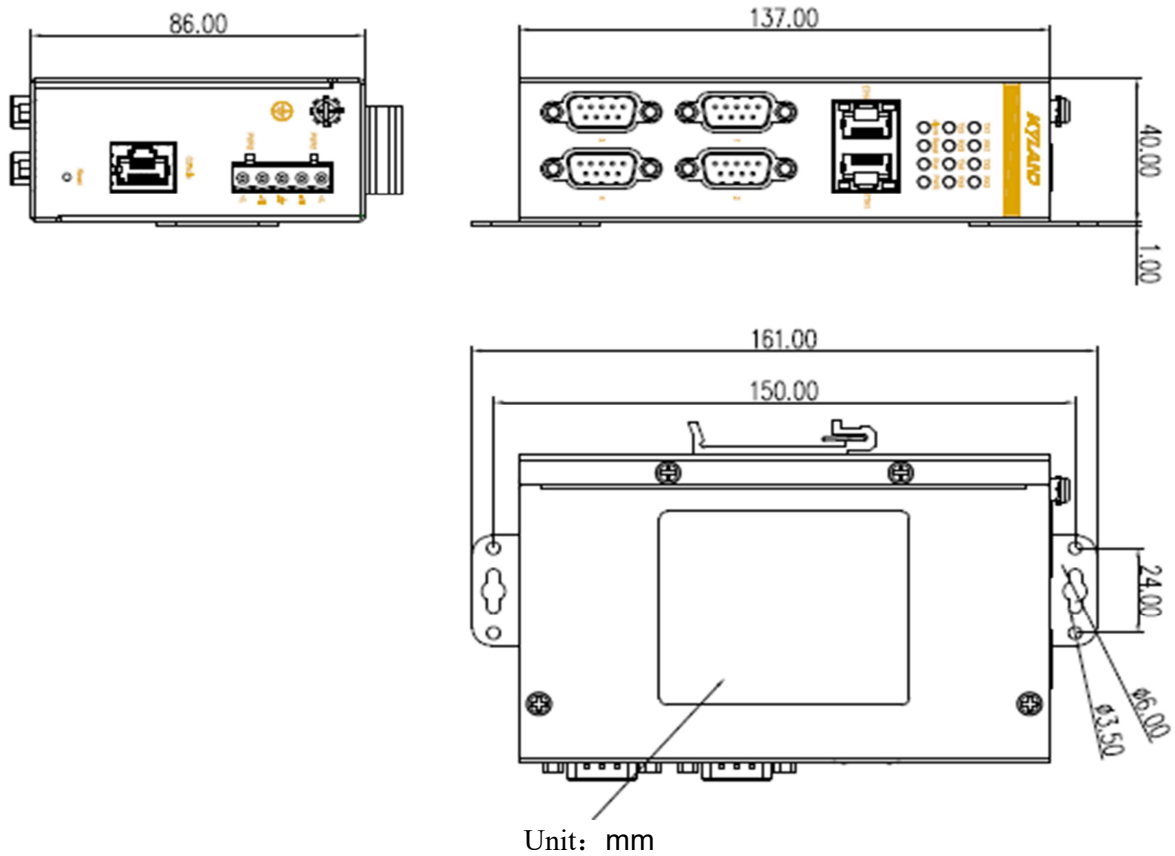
KPS/KGW3204A-2T4D-232/485/422-L17-L17 Dimension Drawing
